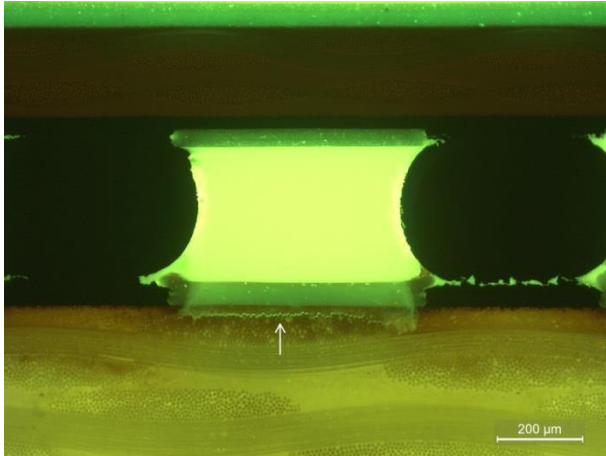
Cross section of solder joints A16 and A15 in the outer row of solder joints to a BGA256 with SAC305 solder joints showing a crack in the PCB laminate between the solder joints.
